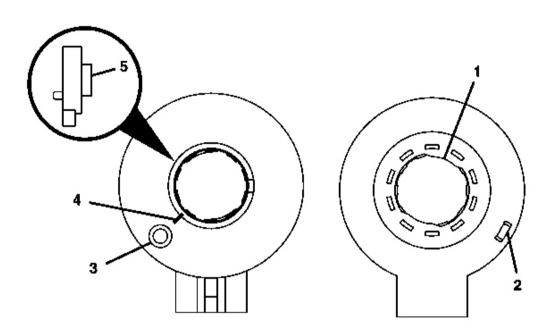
Steering Wheel Position Sensor Front View Courtesy of GENERAL MOTORS CORP.
